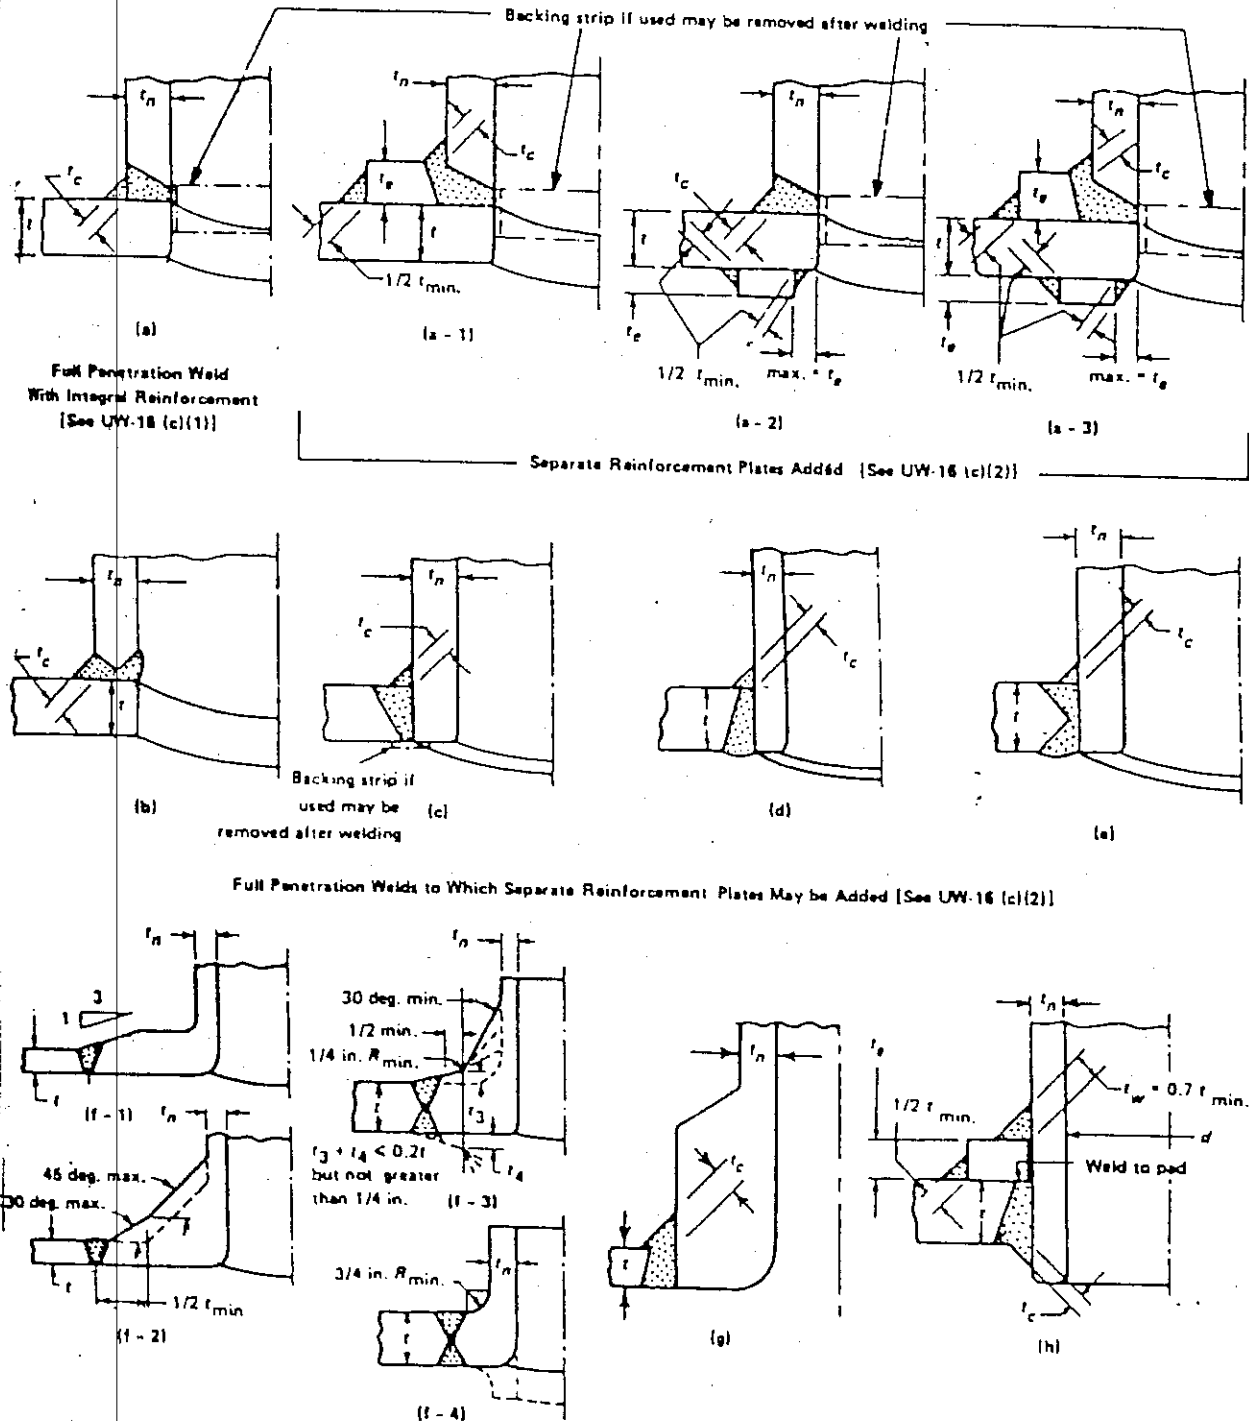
SOME ACCEPTABLE TYPES OF WELDED NOZZLES AND OTHER CONNECTIONS TO SHELLS, DRUMS, AND HEADERS
